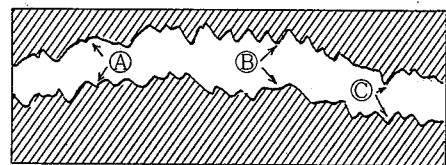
(a) Matching fractographs of fatigued in a mild steel (SB 42). Crack may be passed near the pearlite.
